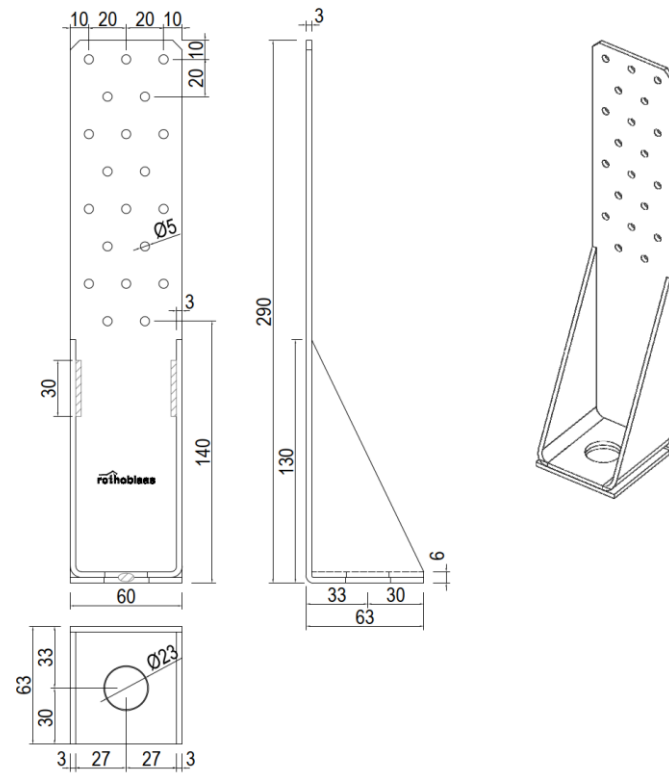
Dimensions of Rotho Blaas WHT20 hold down.
